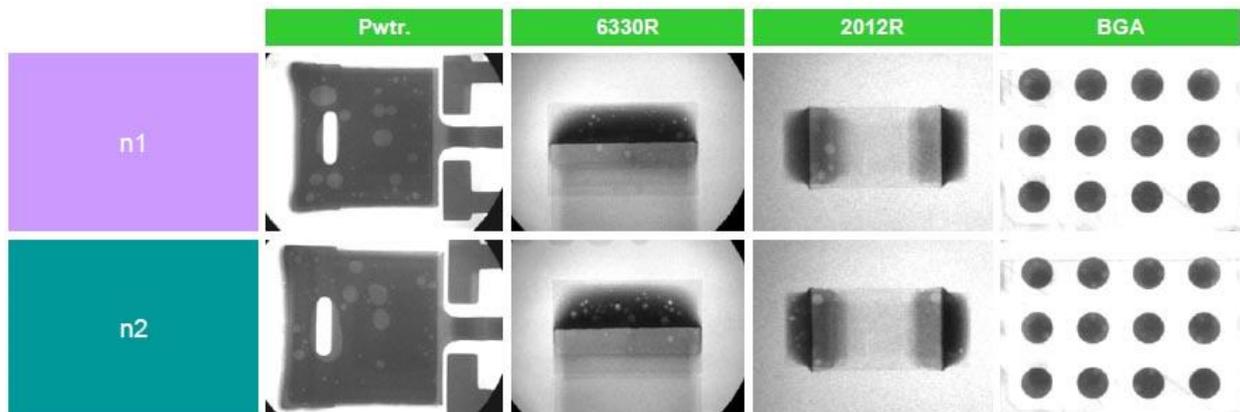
Crack-free Paste A reflow/voiding test data for soldered Power transistor, 6330R chip, 2012R chip and BGA components.
